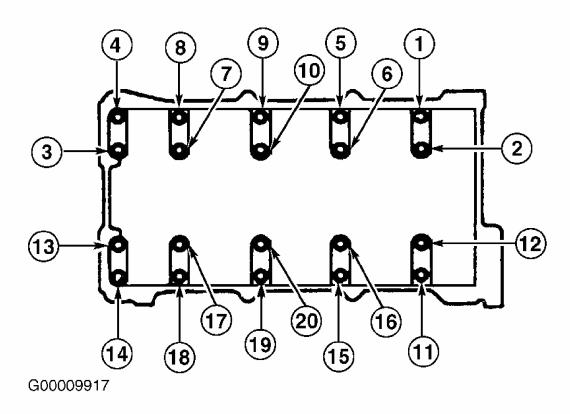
Camshaft Bearing Cap Bolt Loosening Sequence (Miata) Courtesy of MAZDA MOTOR CORP.
